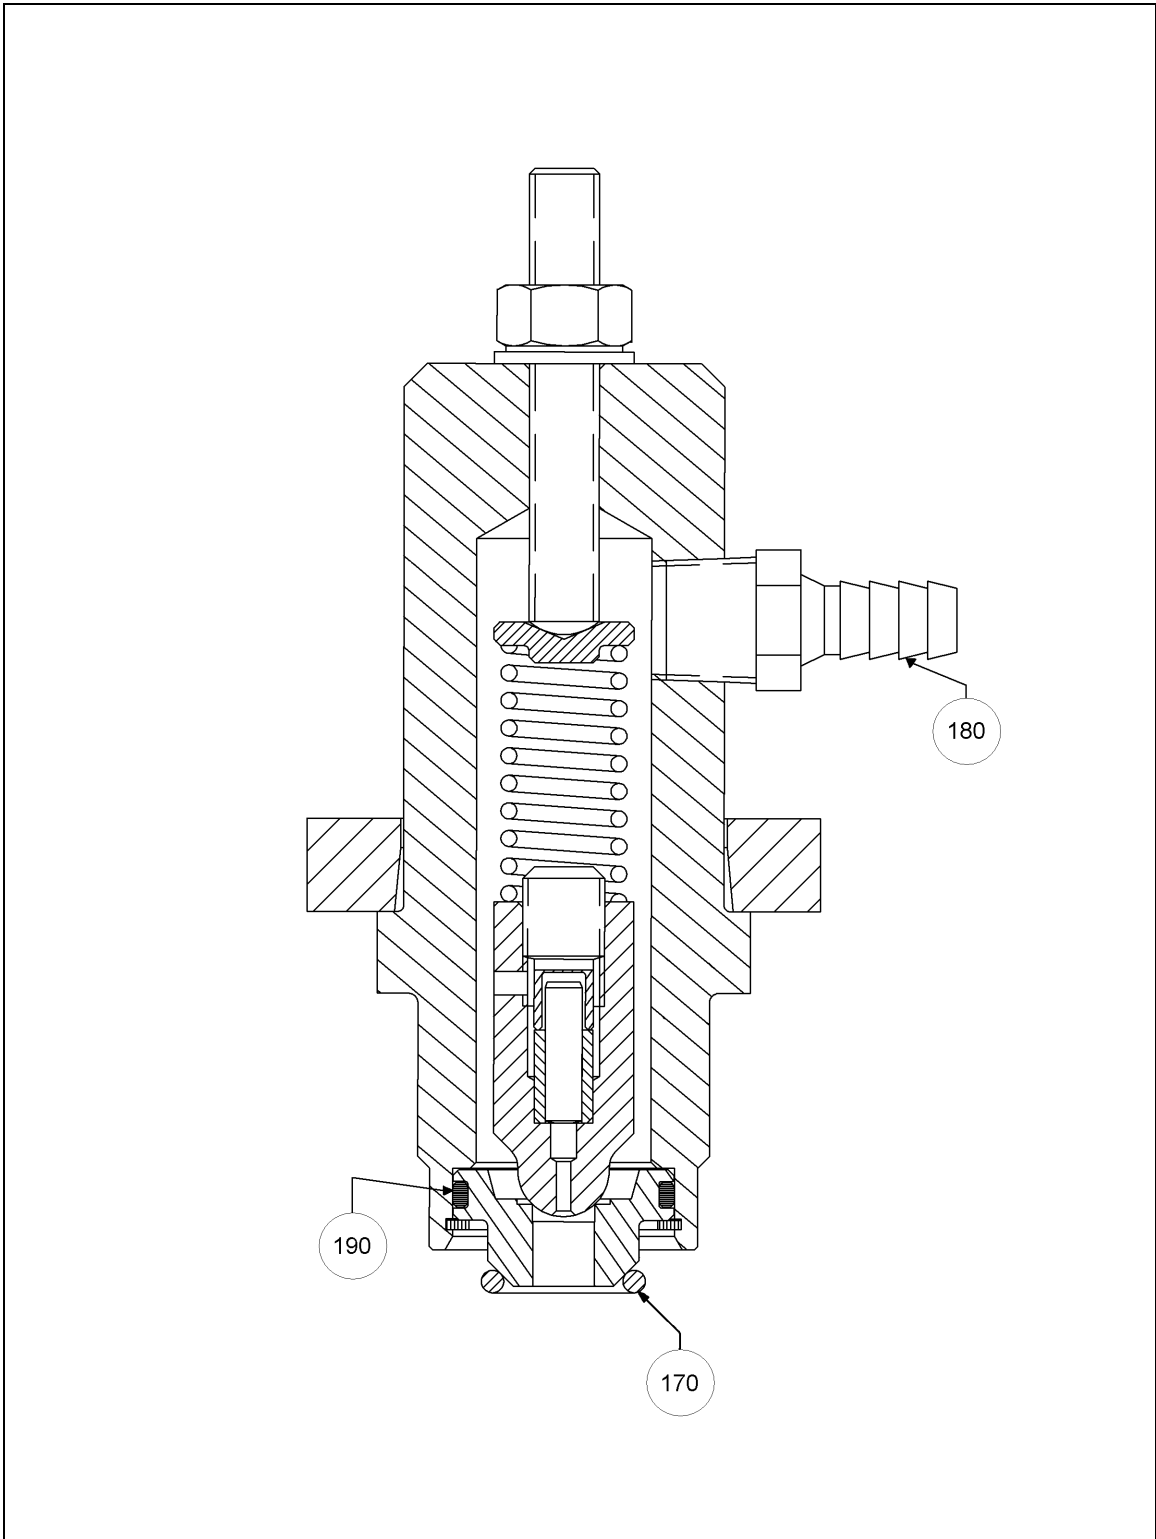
Relief Valve Assembly, Plunger Size 3/4" thru 2 1/2" (101-0021-X06).
